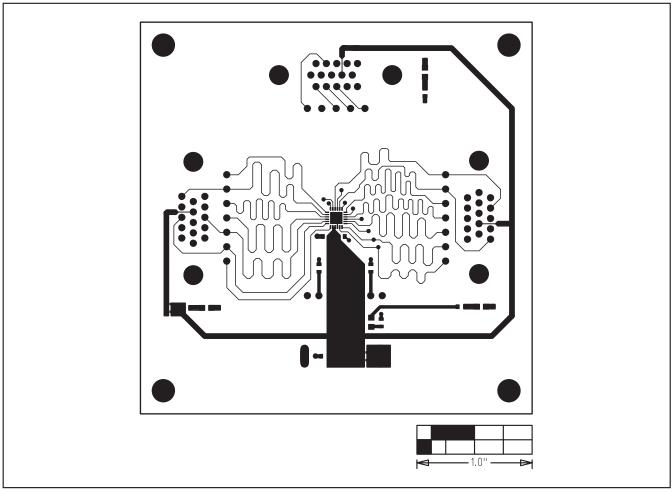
MAX4885E EV Kit PCB Layout—Component Side
